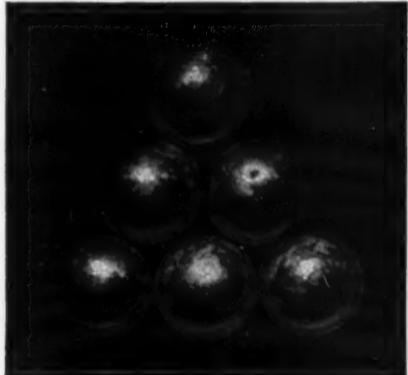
Balls polished smooth, but before final heat treatment and grinding.
